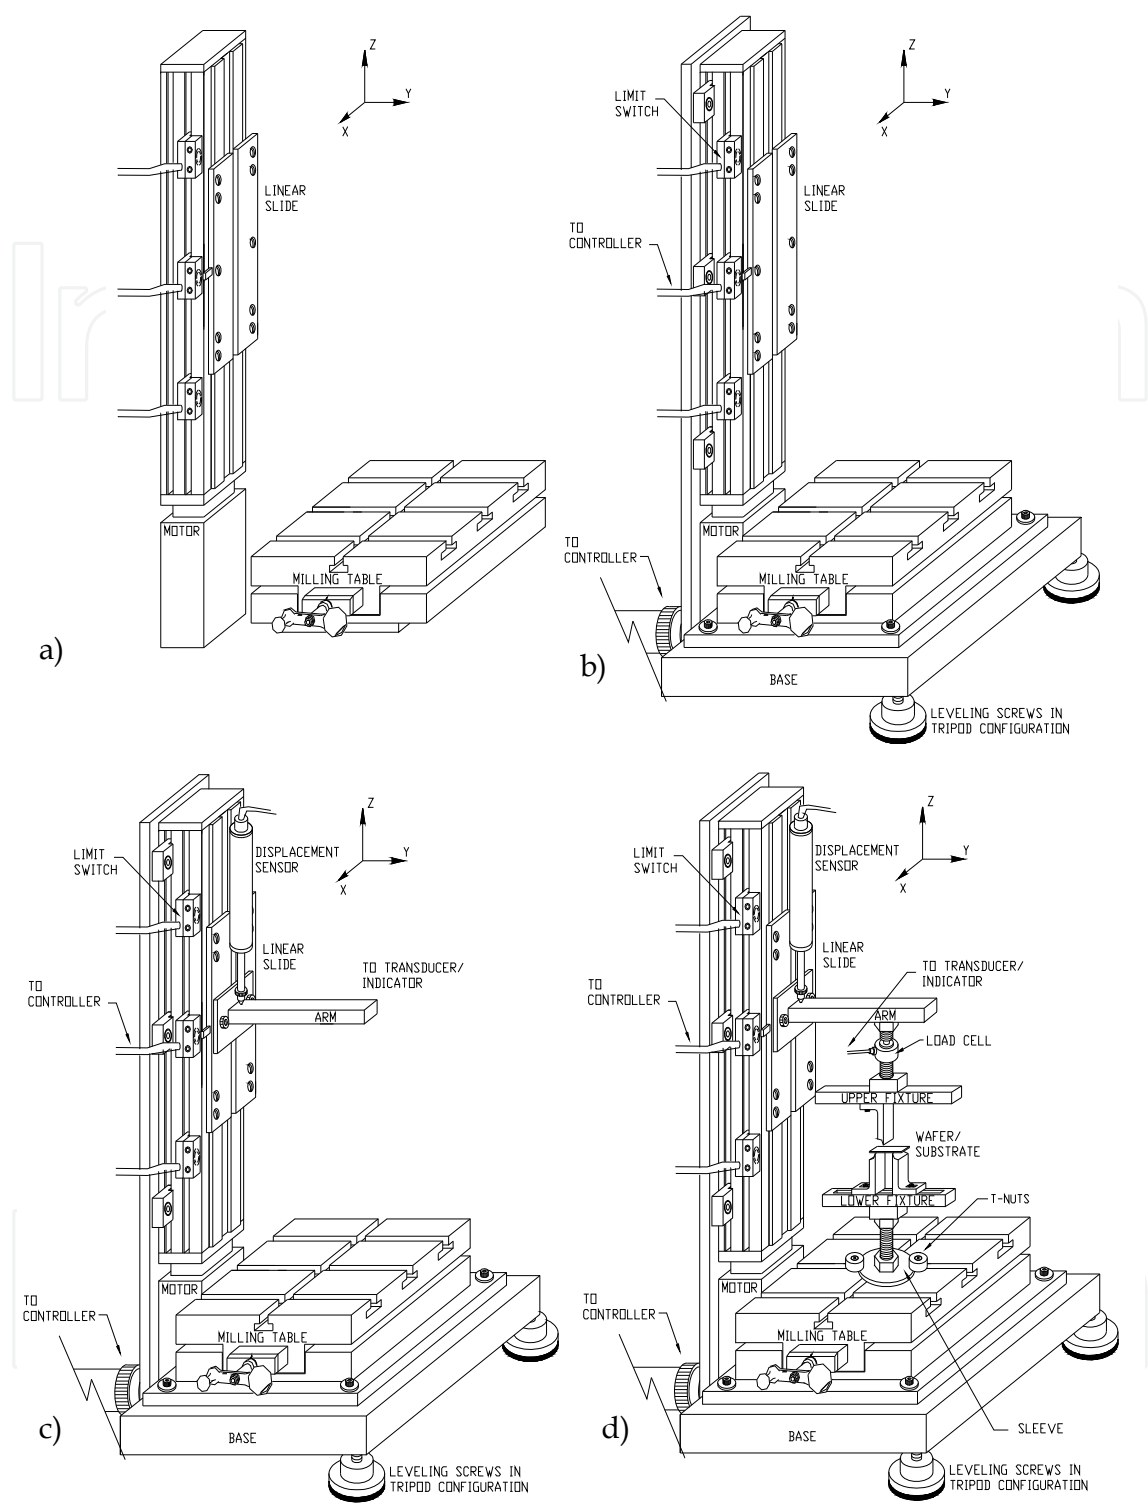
(a) Small-scale loading machine designed around a commercially-available linear slide and milling machine table. (b) Aluminum plates were fabricated to connect the slide and table with keyways for easy and reproducible assembly. (c) An arm attached to the slide and t-slots in the milling machine table enables a variety of fixtures to be assembled in the platform, such as those shown for three-point bending (d).
